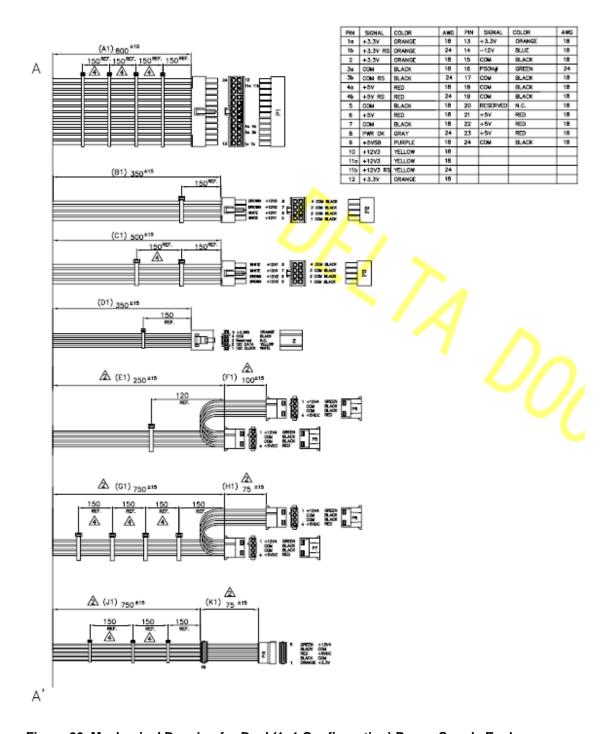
Mechanical Drawing for Dual (1+1 Configuration) Power Supply Enclosure
